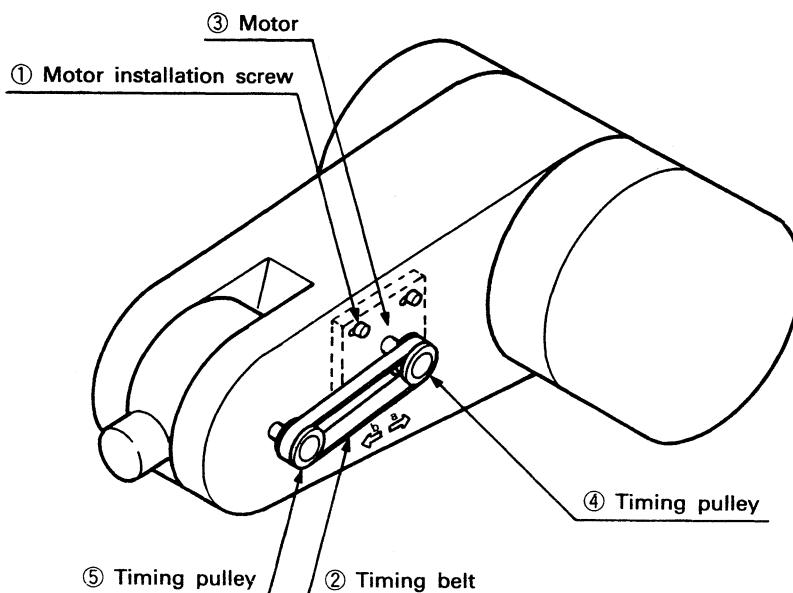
Checking, Adjusting and Changing the Wrist Roll Drive Timing Belt
